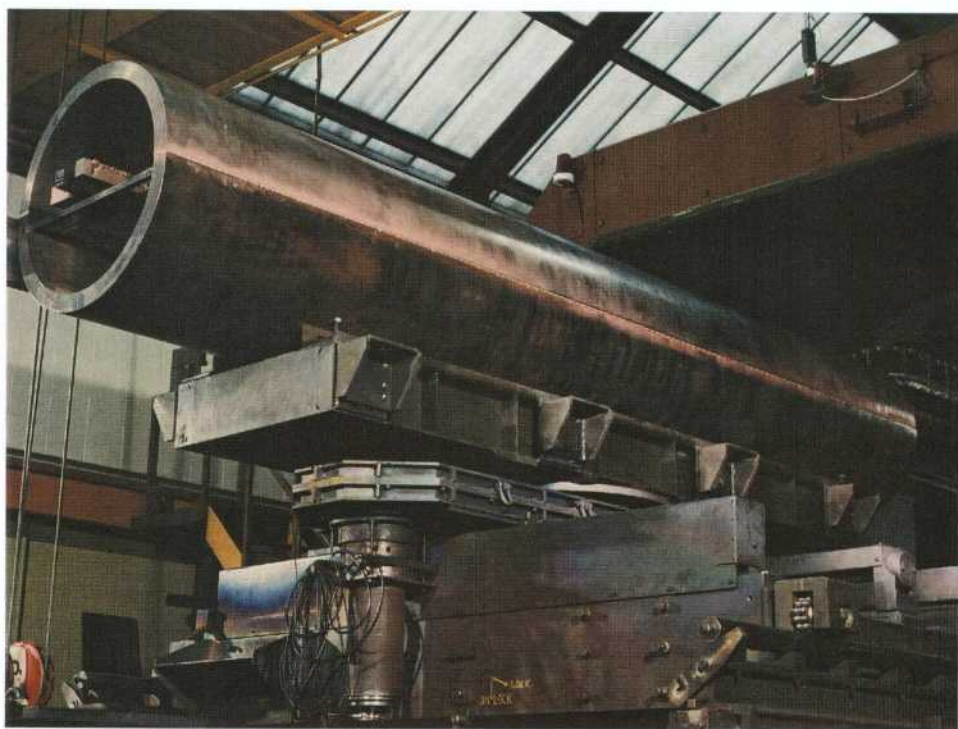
The vacuum chamber for electron beam welding. The photo shows a welded copper tube at the opening of the vacuum chamber.
